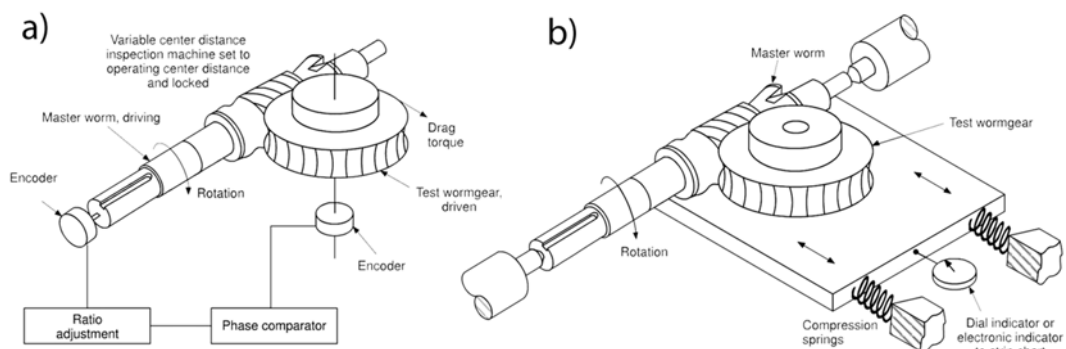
Schematic of worm gear tester (source [10]): (a) Single-flank test; (b) Double-flank test.
